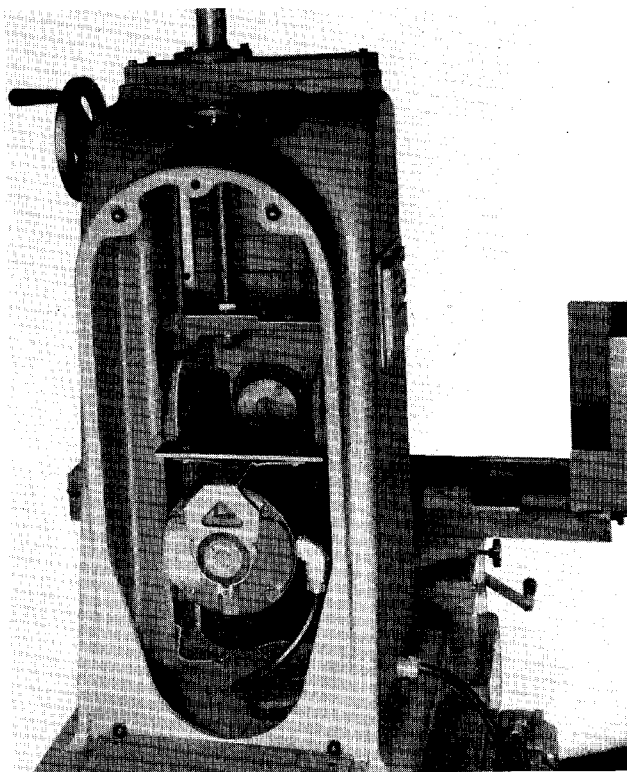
Motor mounted in rear of upright when Oriflex Drive is used.
